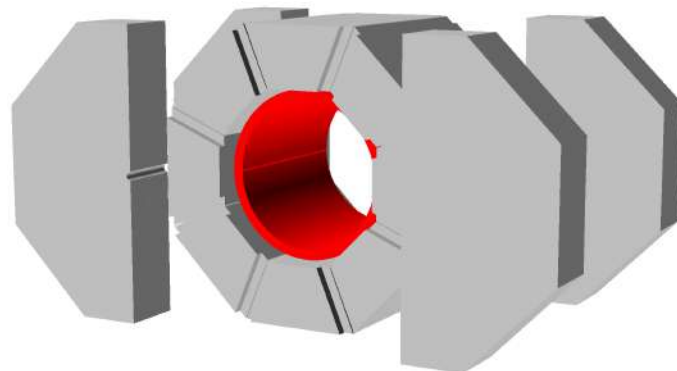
Final configuration with the magnet installed and bolted to RS.
